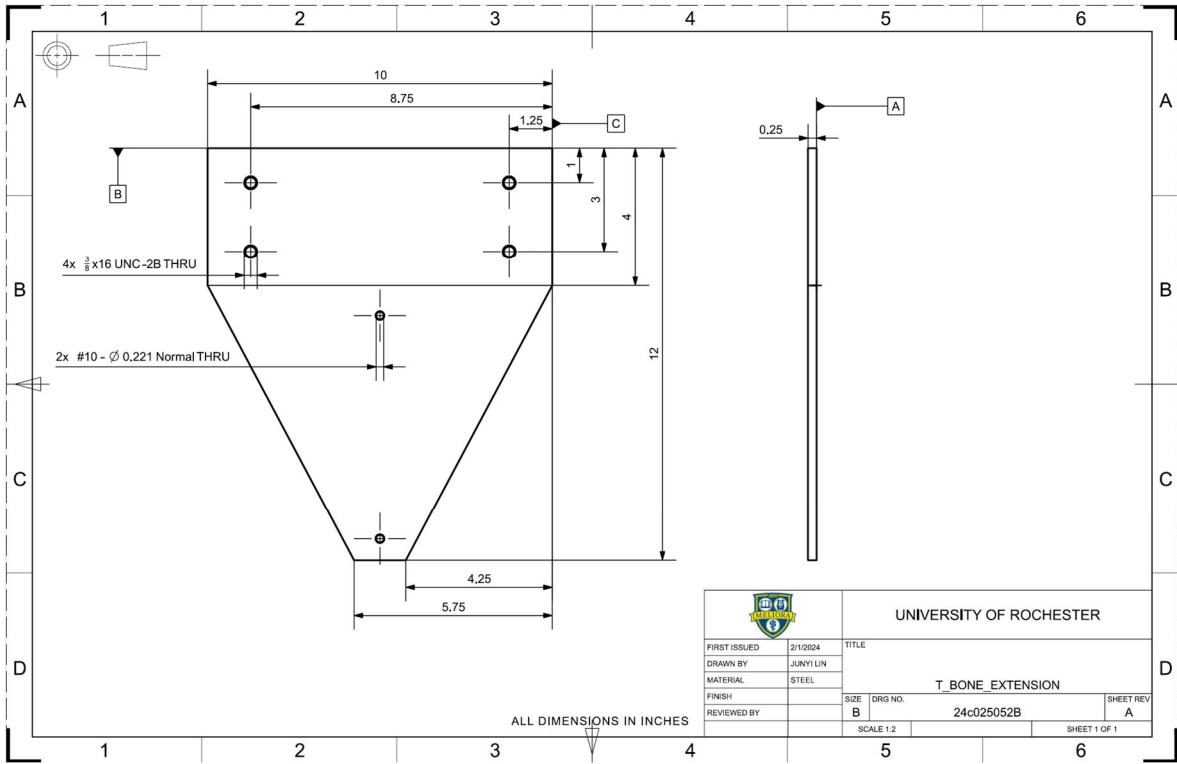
Engineering drawing of testing rig, T-Bone extension.
